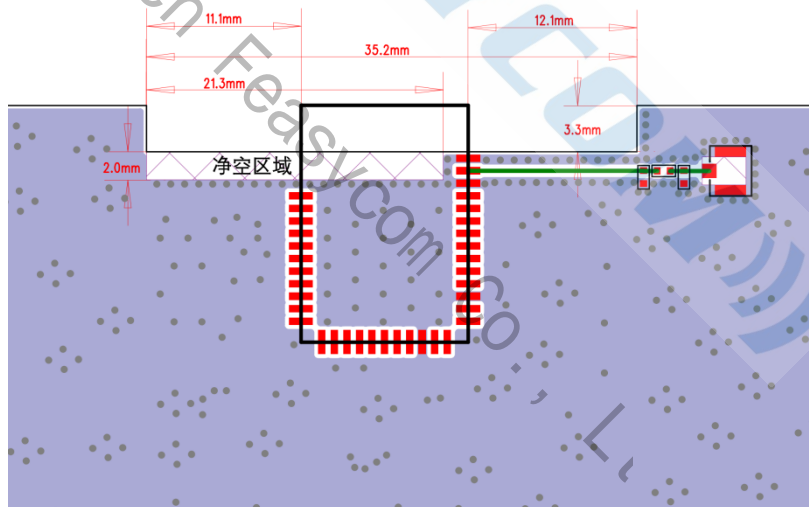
Module Layout - Baseboard TOP Layer
